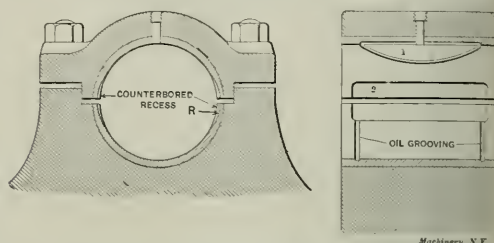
Section of Outboard Bearing, showing Oil Grooving and Counterbored Recess.
